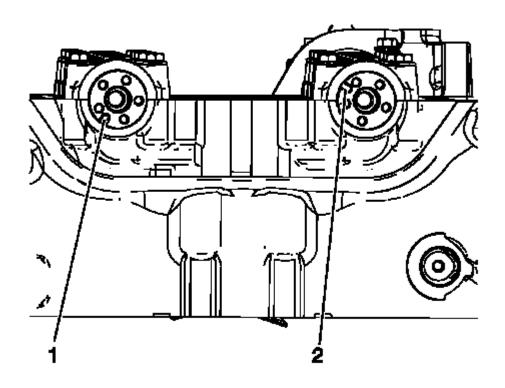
Proper Exhaust/Intake Camshaft Alignment Positions Courtesy of GENERAL MOTORS COMPANY
